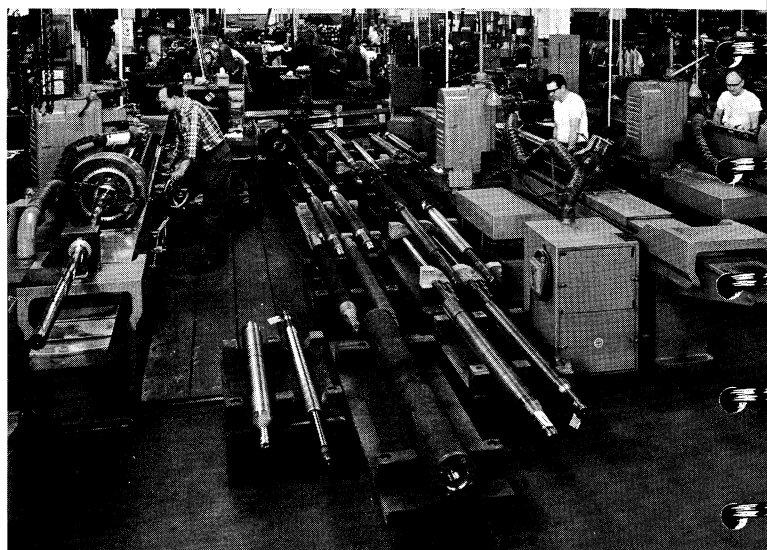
Thirteen 100-in. grinders with 14-in. dia index plates, precision lead bars and ultra-precision dresser templates produce Red Ring large gear and spline broaches.
